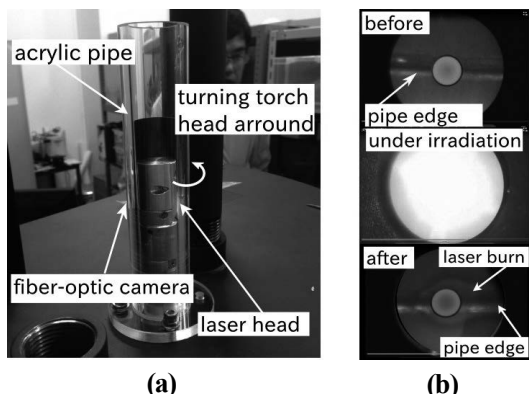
(a):Laser Beam Welding Torch, (b):Operation Screen
